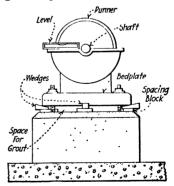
Leveling a rotary pump "cross-wise" with the level on the flange of the runner casing.
